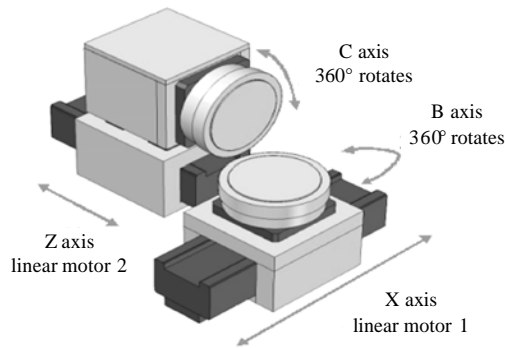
Overall arrangement of 4-axis ultra-precision lathe
